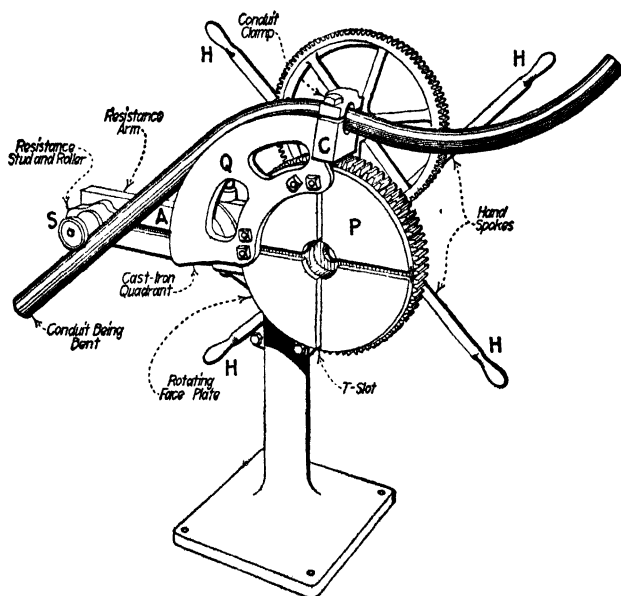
Pedrick bending machine, forming turn in 1 1/2-in. conduit.
